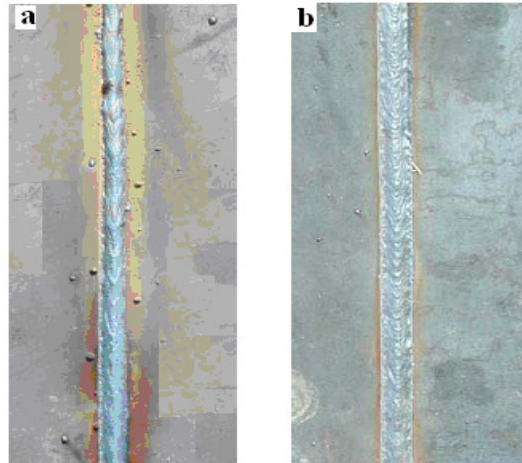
Appearance of weld bead carried with different electrodes (a) mild steel and (b) low-alloy steel
